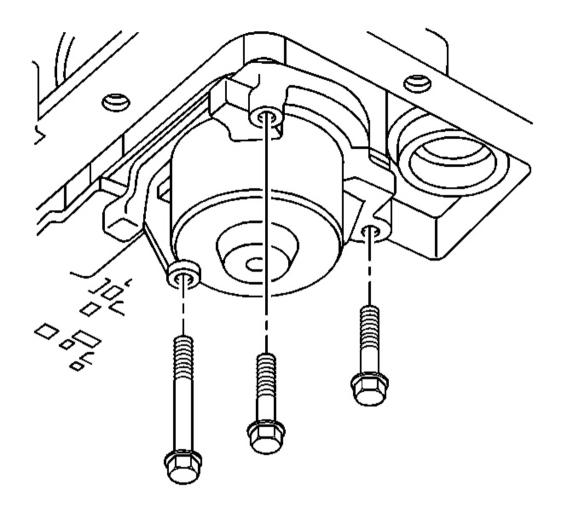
Removing The 1-2 Accumulator Cover Courtesy of GENERAL MOTORS CORP.
